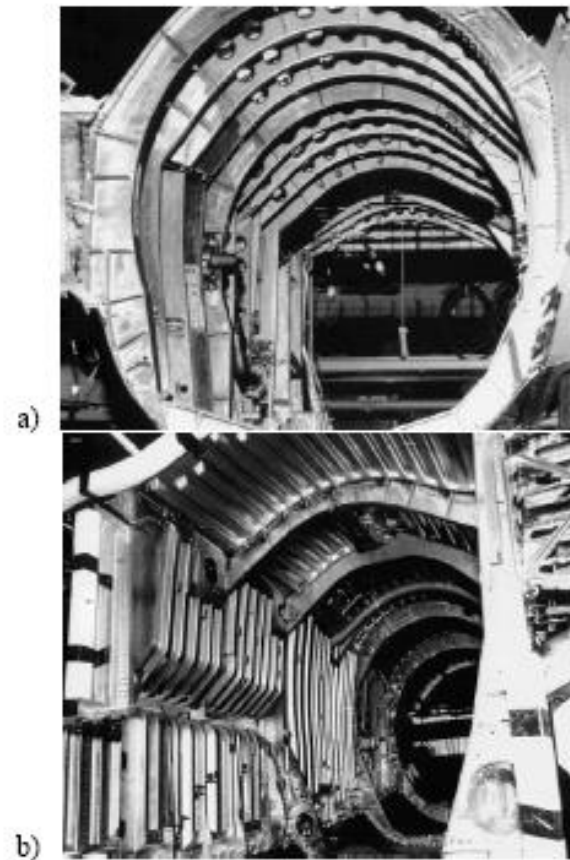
F-15E aft fuselage: conventional assembly (a) and SPF/DB structure (b) [41]
